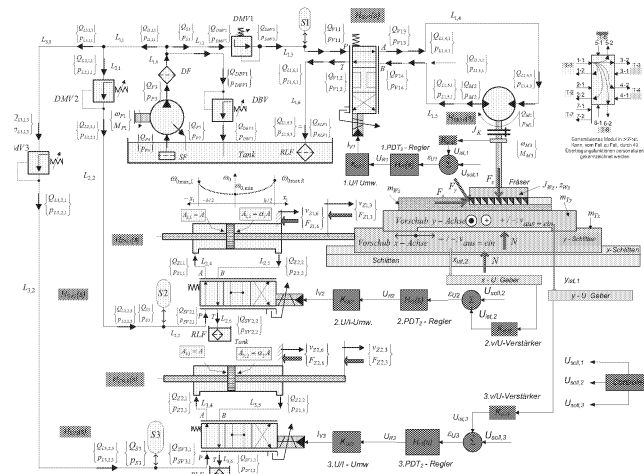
Hydraulic Drive Installation of a Milling Machine with Plane Milling Rotation
